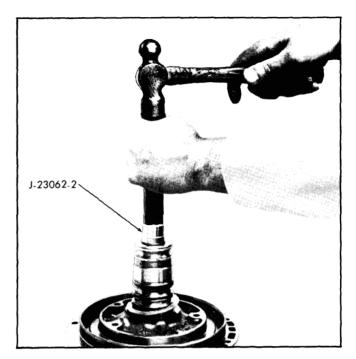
Installing Inner and Outer Stator Shaft Bushings
